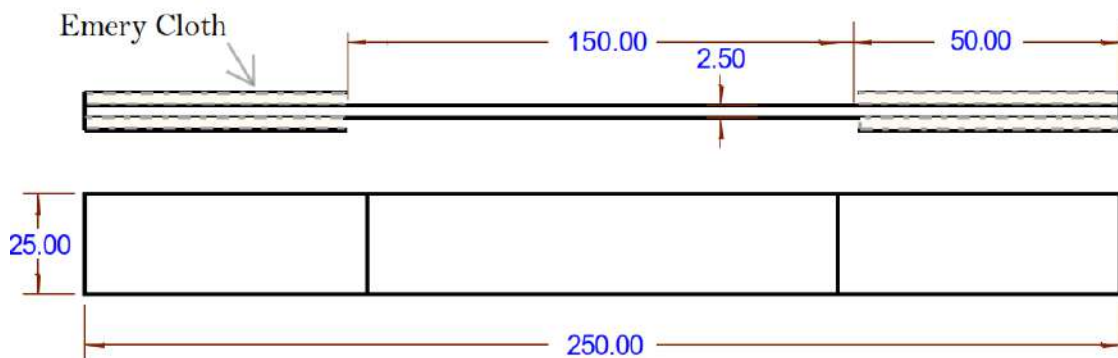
E-glass/Epoxy test specimen Heating Tensile Test Specimen
